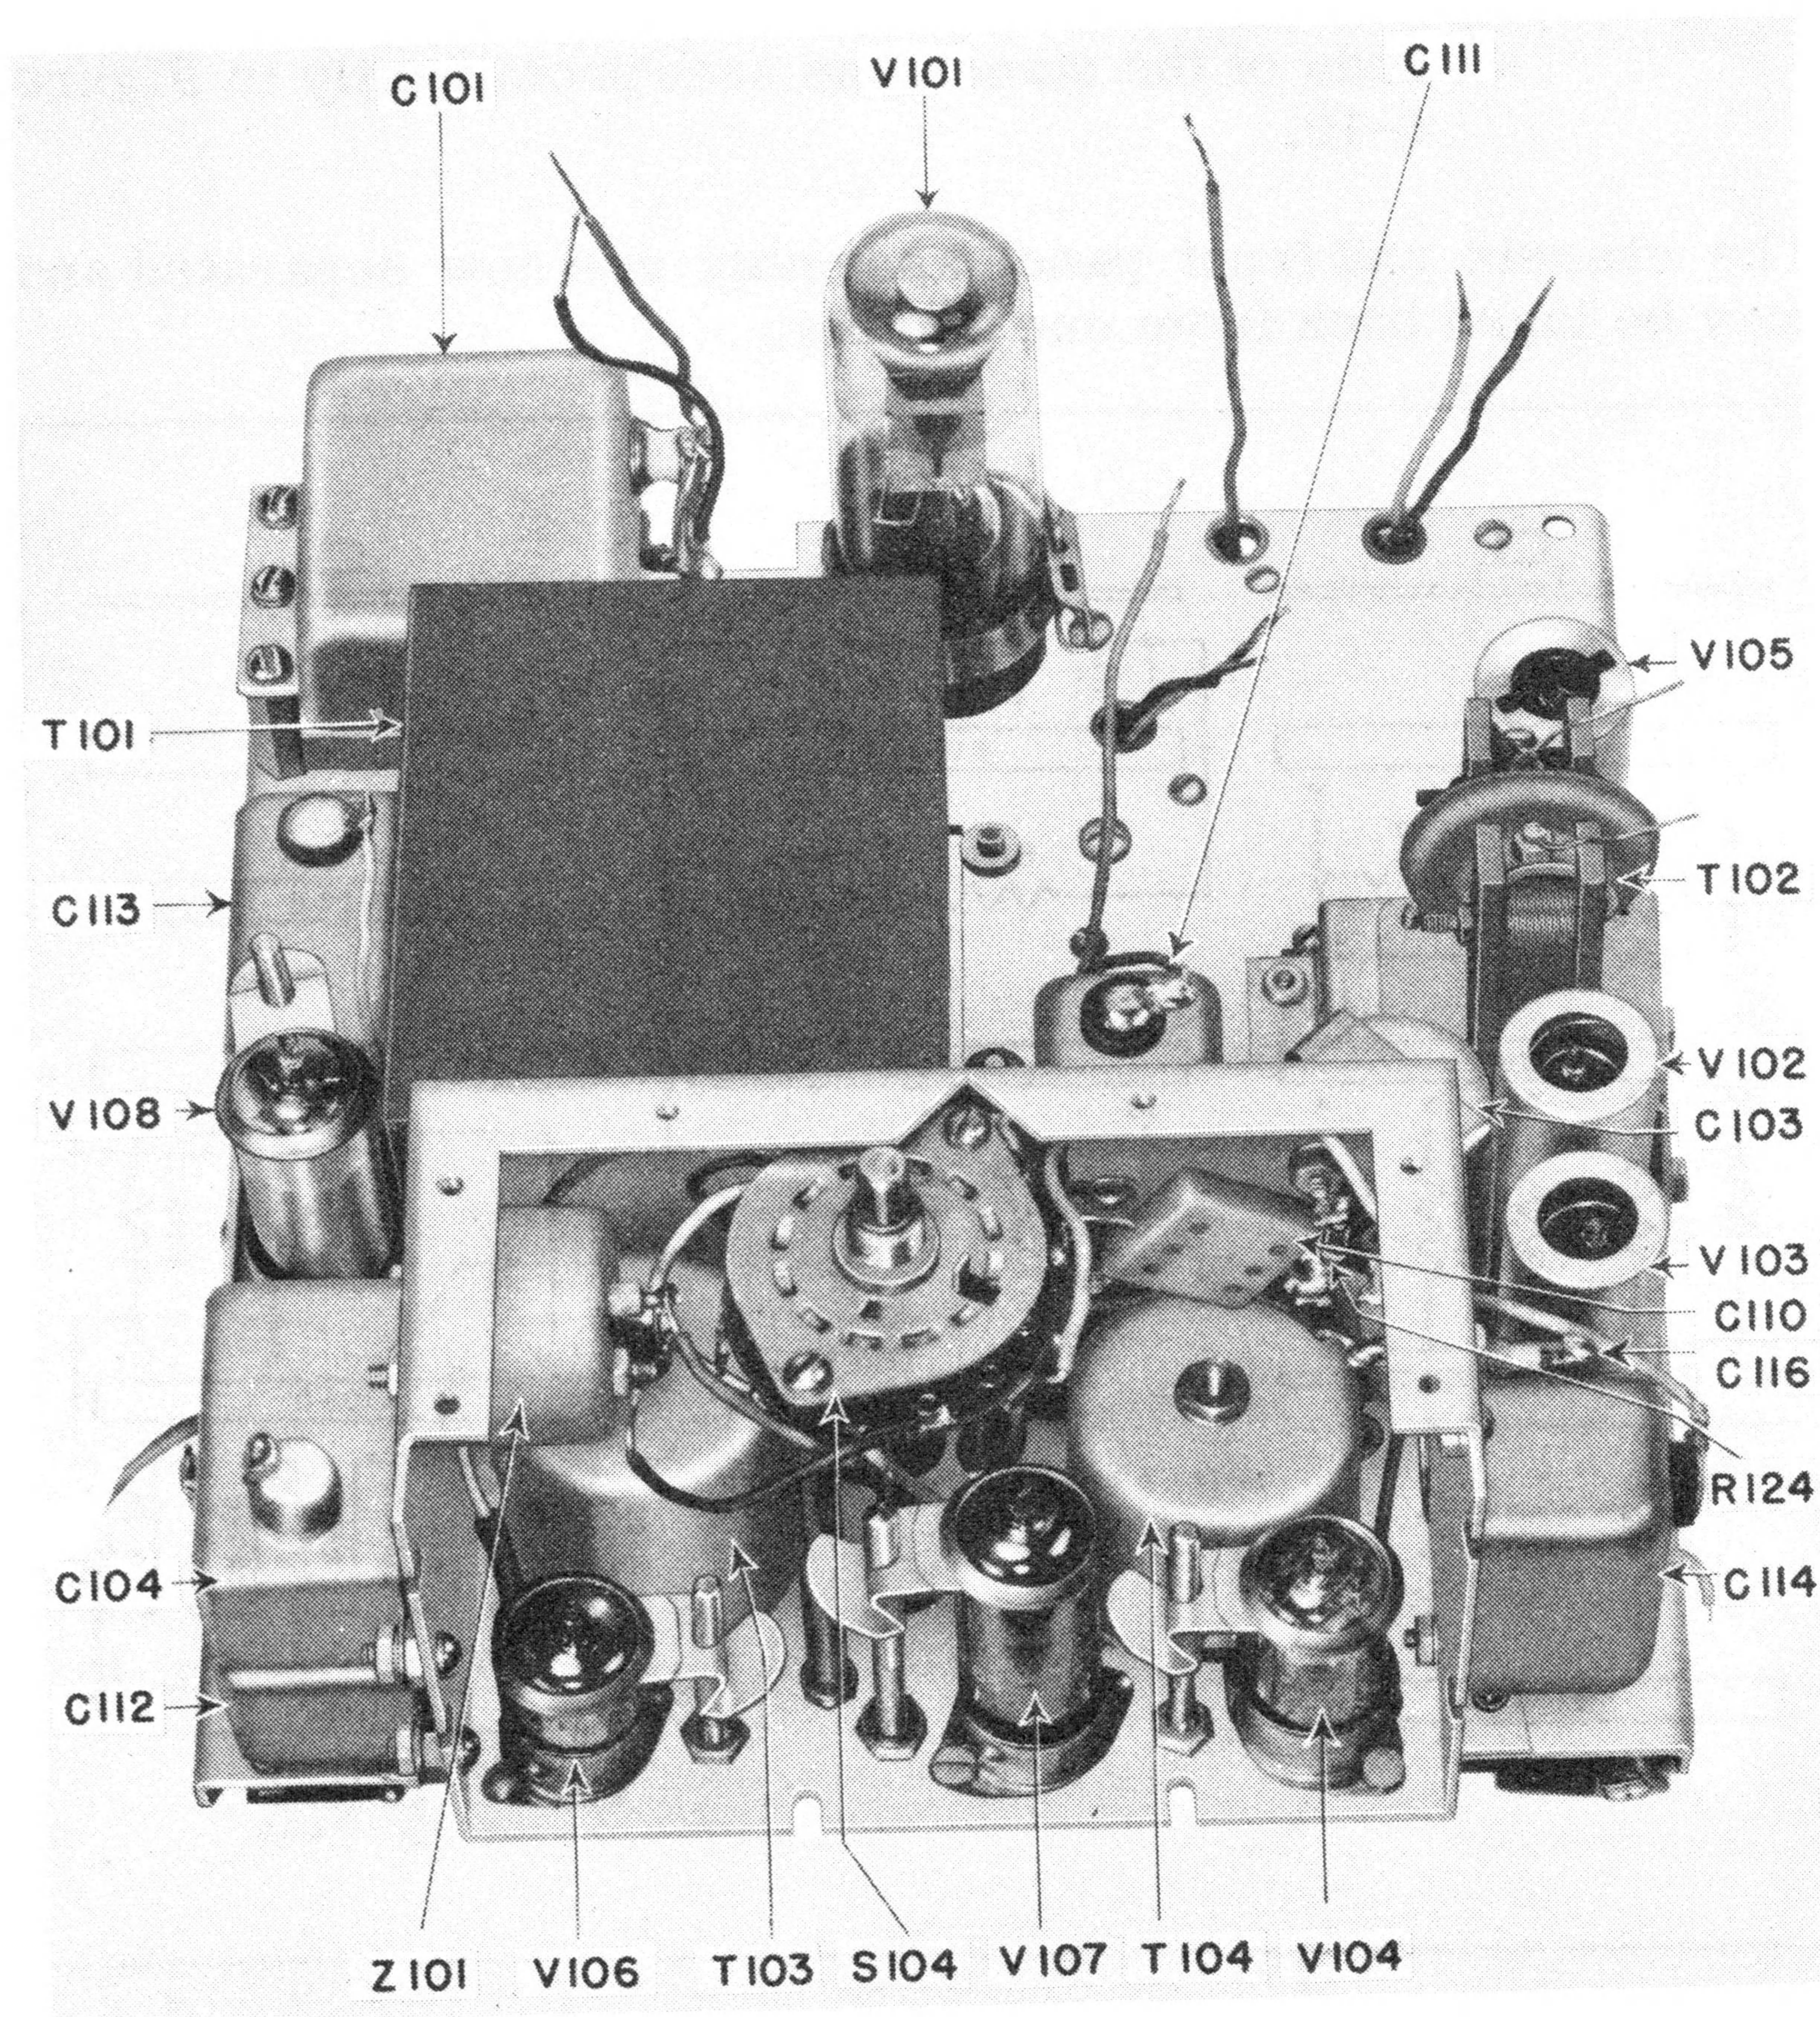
Bridge, ZM-11/U, Chassis Assembly, Unsandwiched.
